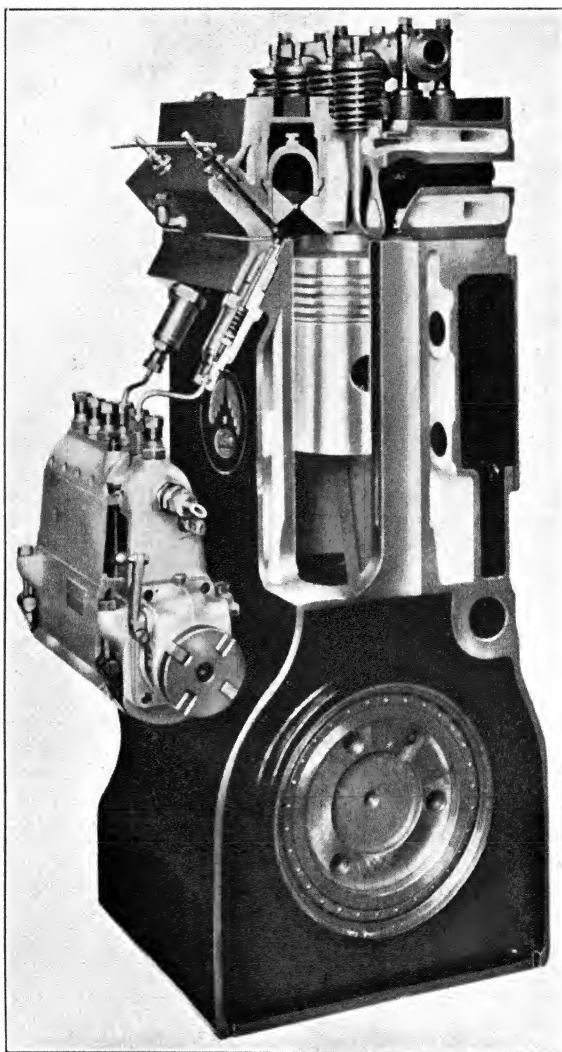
SECTION THROUGH ARMSTRONG-SAURER 6-CYLINDER DIESEL ENGINE.
